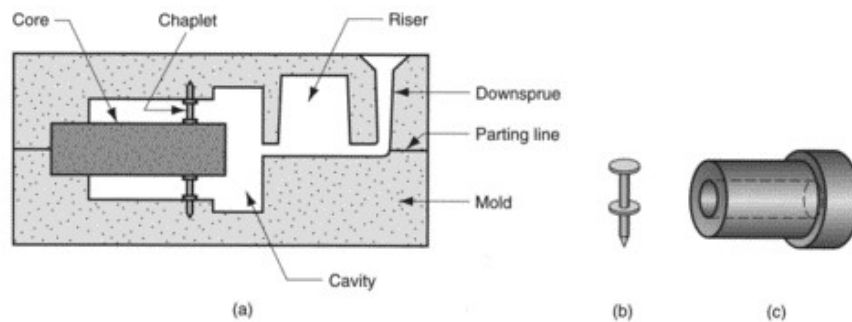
(a) Core in a mold supported by chaplets (b) A chaplet design (c) Hollow cast product [7]
